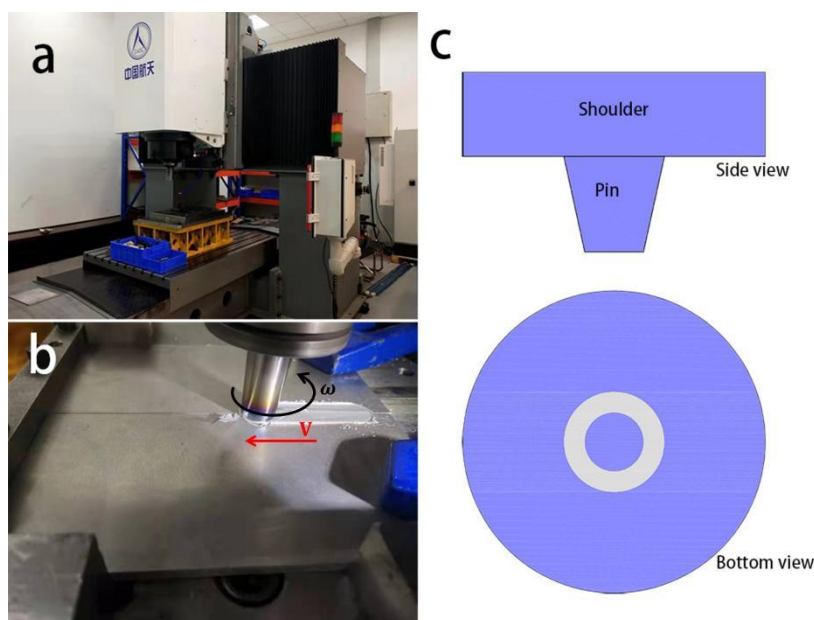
(a) Photograph of the FSW equipment. (b) the FSW process. (c) simple geometry of the stir tool.
